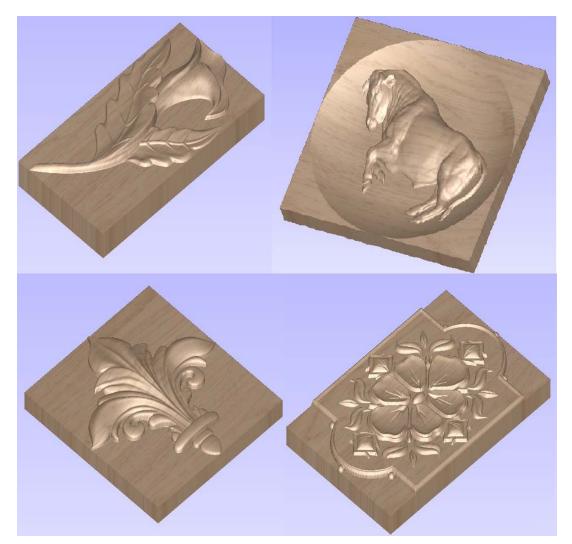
The 3D CAD models of the machined parts (VA3D Machinist software).
